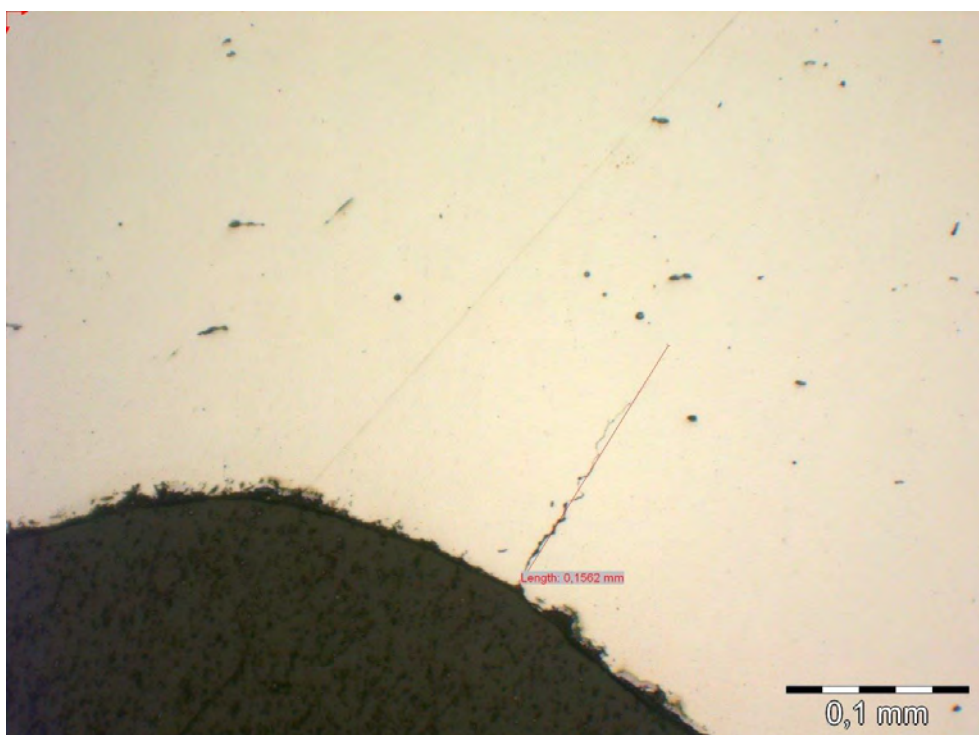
Cut five in crack at segment B, third ridge on barrel no. SFK 0120-A
